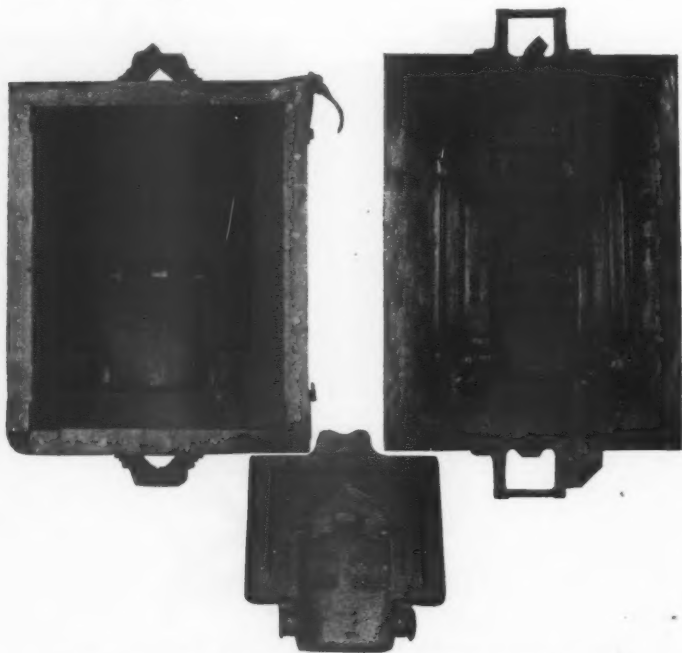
JOURNAL BOX COVER MOUNTED FOR TABOR MACHINE.
